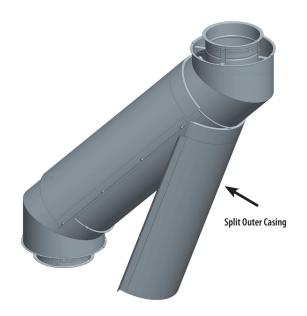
Step 7-9- Secure the Double Flanged Sleeve and seal the Retaining Flange Collar
